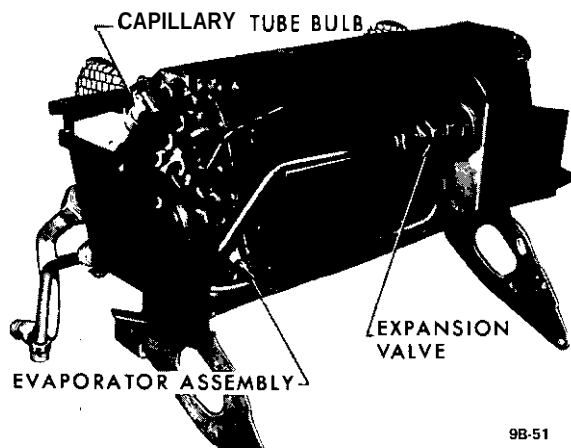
B-95 Evaporator and Expansion Valve Assembly GT
